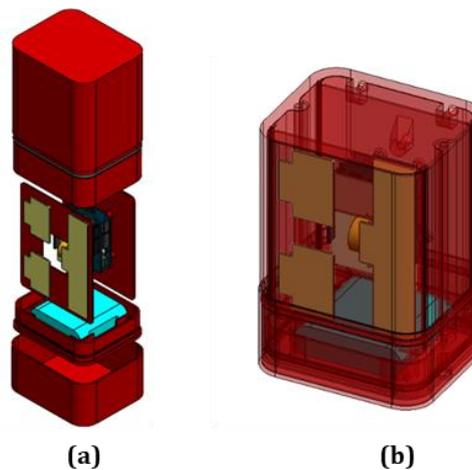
(a) Exploded assembly of the integration; (b) Isometric view of integration
